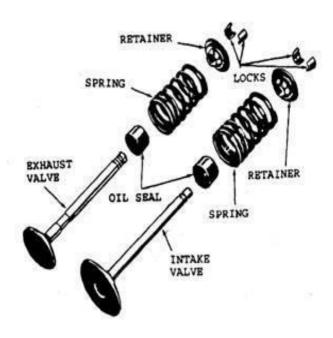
Schematic diagram of engine inlet and exhaust valves
